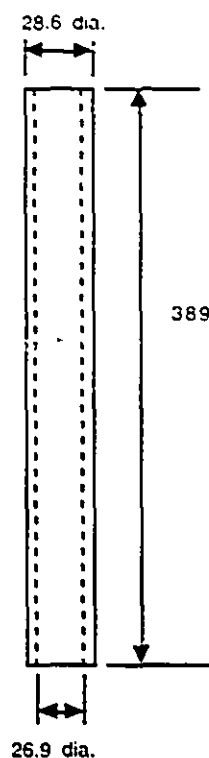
Seat Tube Insert (all dimensions in mm)
